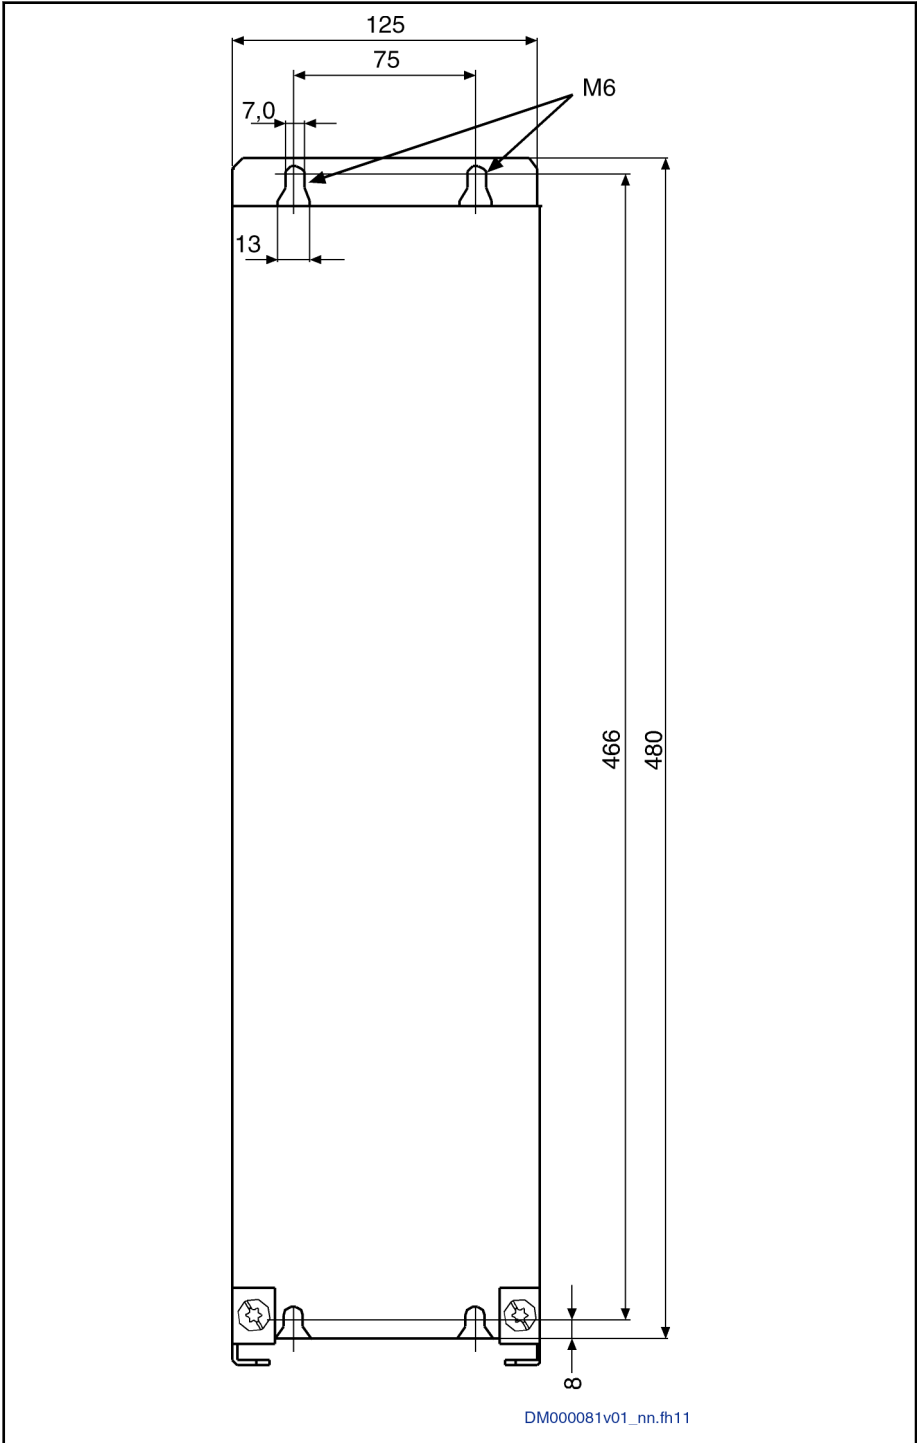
Boring dimensions HCS03.1E-W0070
